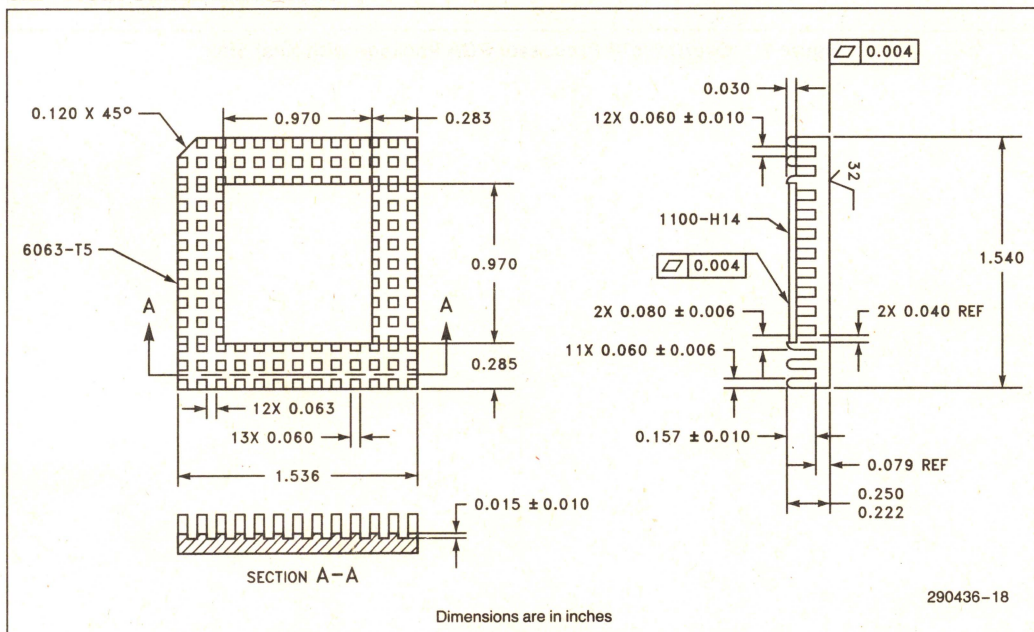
Intel OverDrive™ Processor Heat Sink Dimensions
